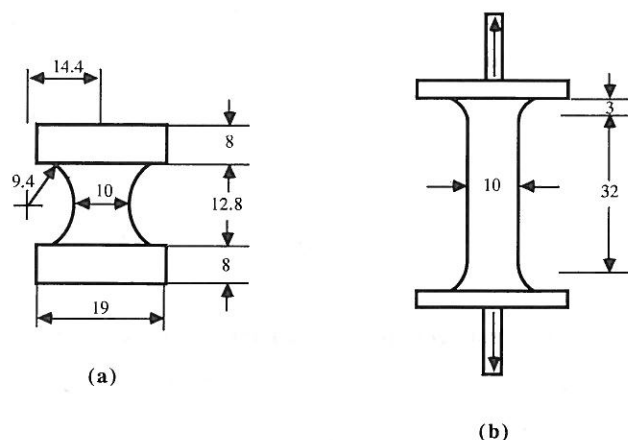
(a) A capstan-shaped specimen used in torsion tests; (b) A dumbbell-shaped specimen used in tensile tests. Dimensions are shown in mm.
